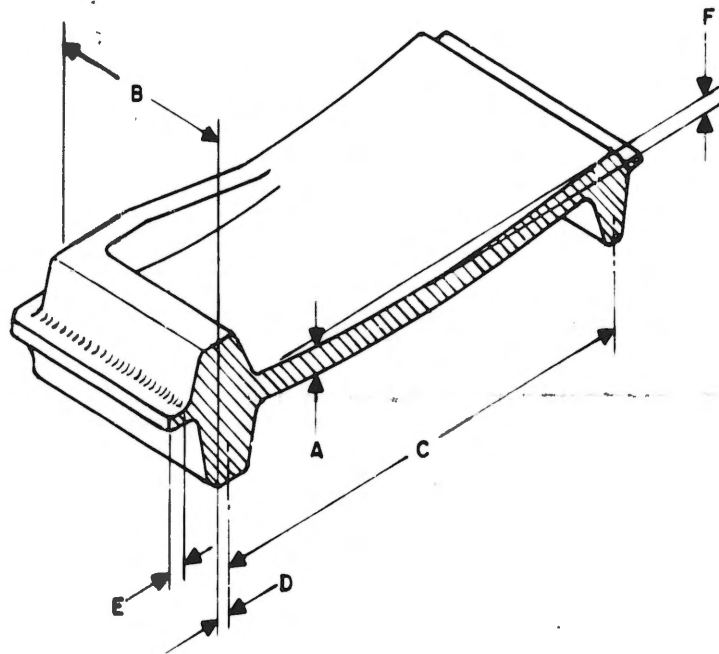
Minimum Forgeable Fillet Thickness (unconfined)
